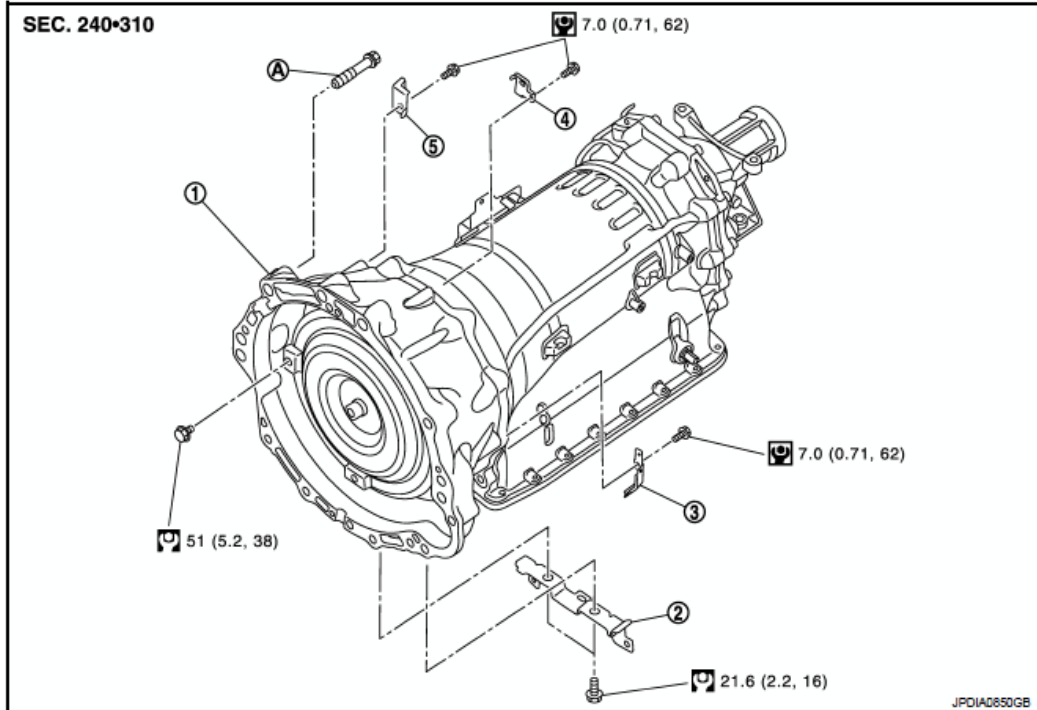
Exploded View Of Transmission Assembly With Torque Specifications
